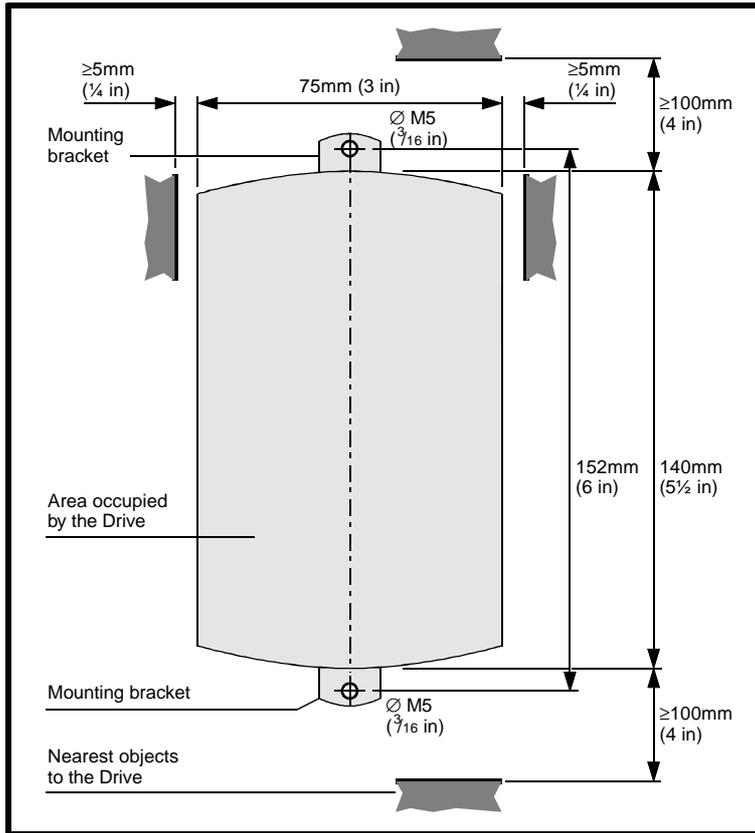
Preparing the panel/wall or surface for panel mounting
